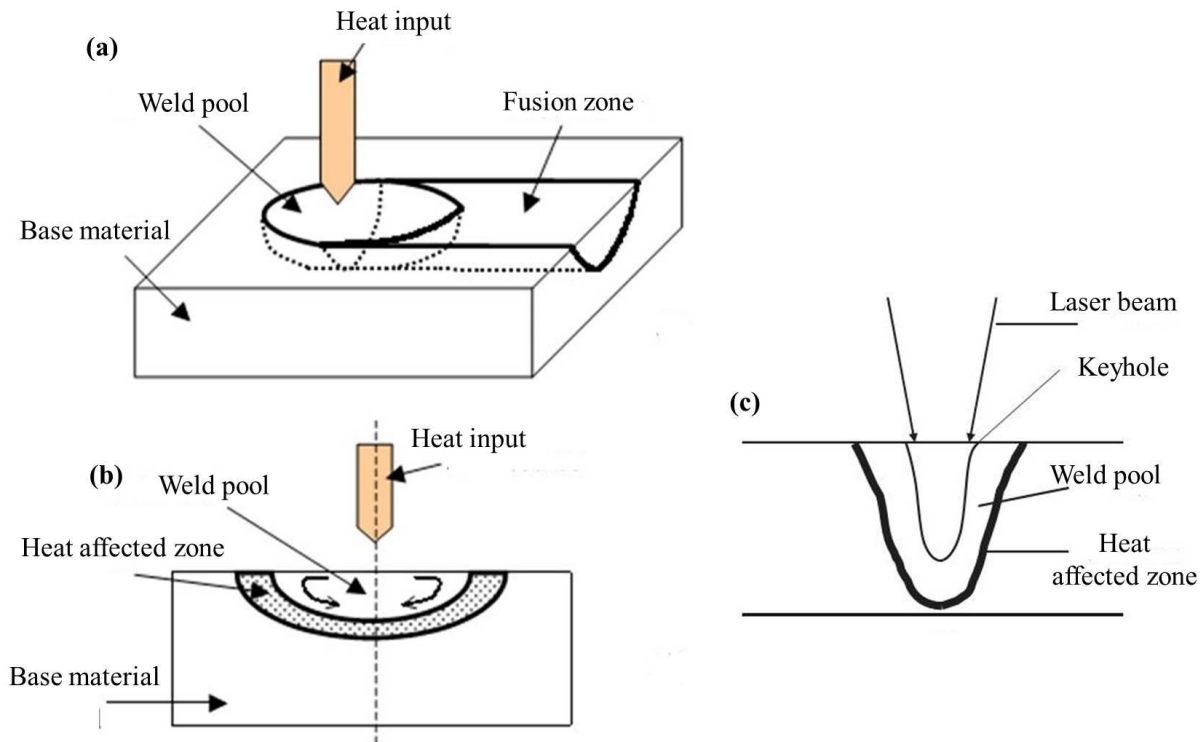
Schematic representation of conduction mode fusion welding process and keyhole mode laser welding process: (a) interaction between the heat source and the base material, (b) the transverse section and (c) the transverse section portion of keyhole mode laser welding process [10].
